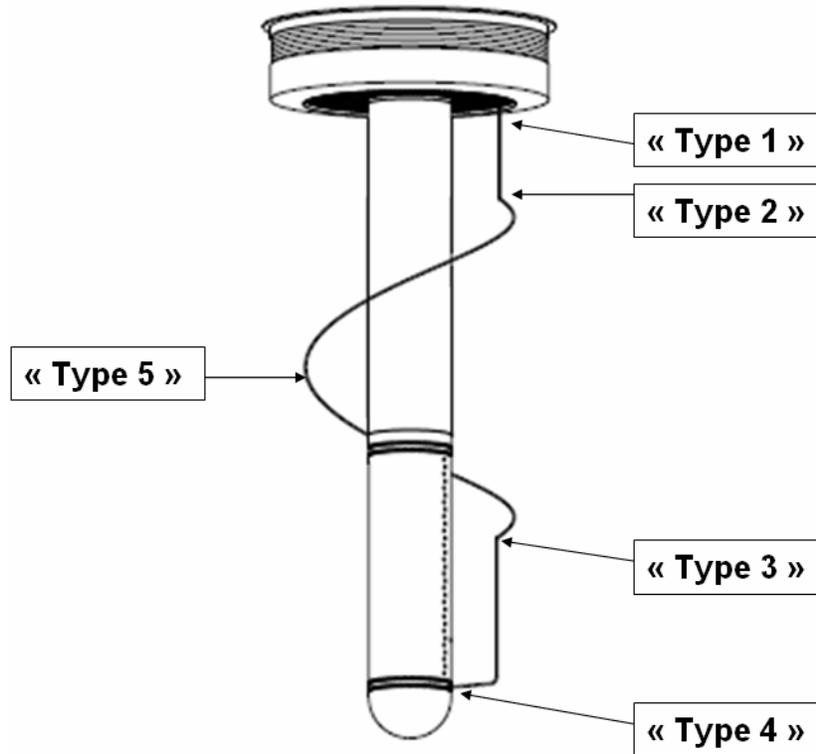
Possible Weld Type in a Tubular IHX
